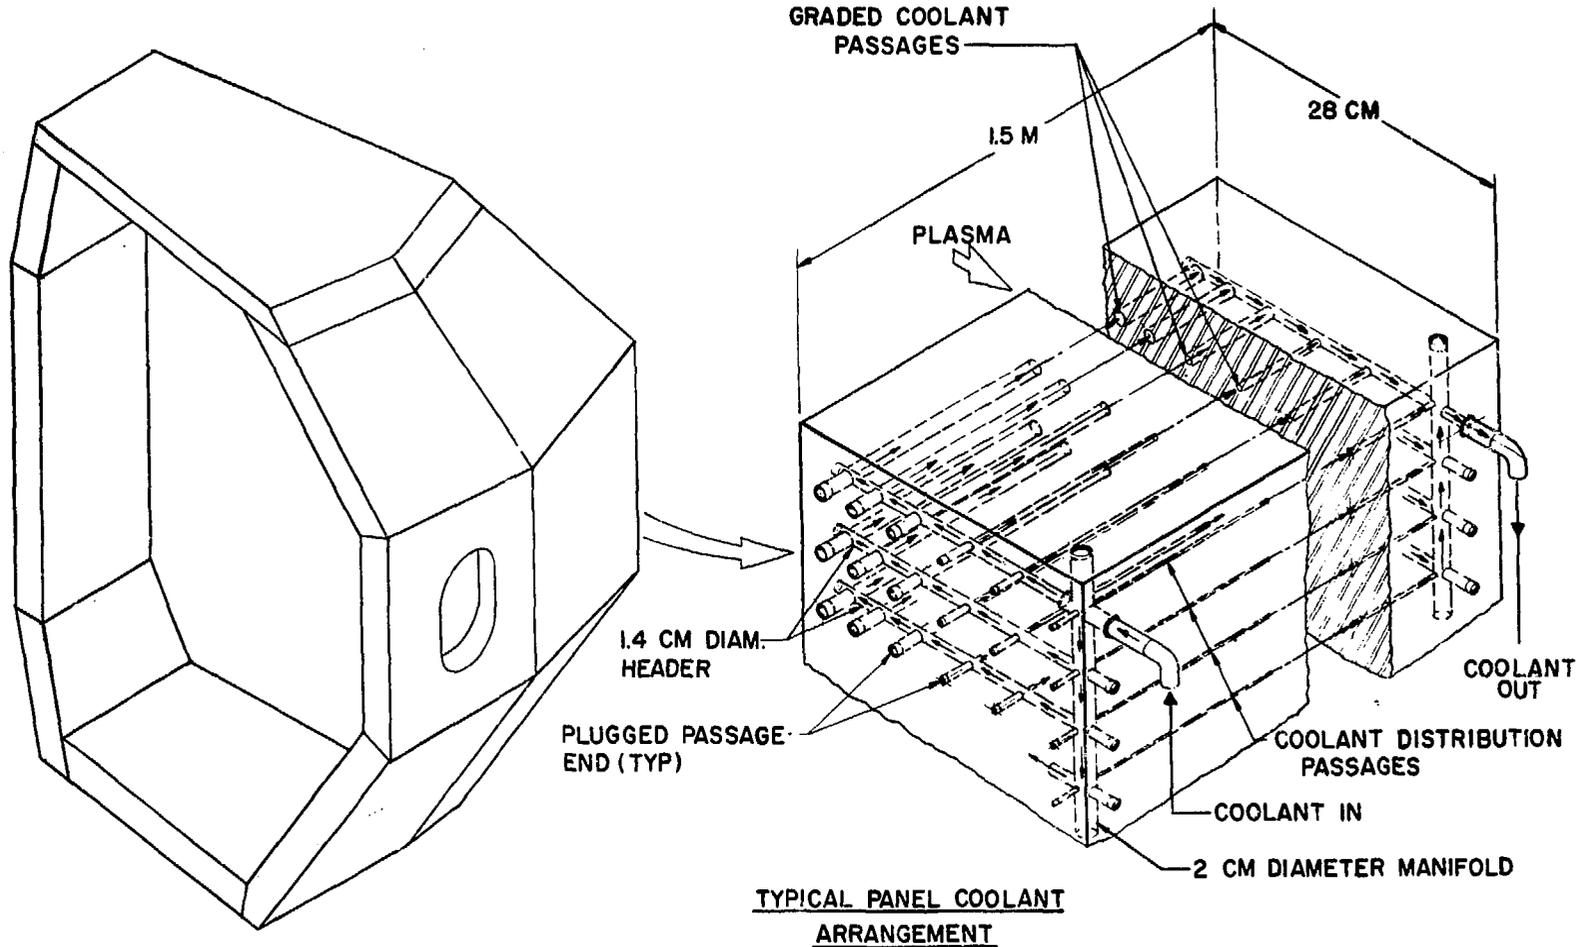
Coolant Channel Arrangement for Stainless Steel Blanket Blocks Cooled with Water, Helium or Steam.
